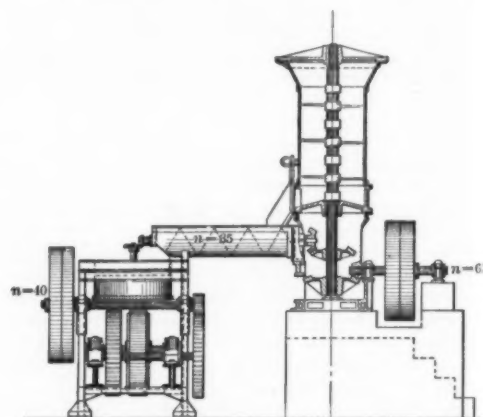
ARRANGEMENT OF BRIQUETTING PRESS PROVIDED WITH KNEADING MECHANISM. LONGITUDINAL SECTION.
